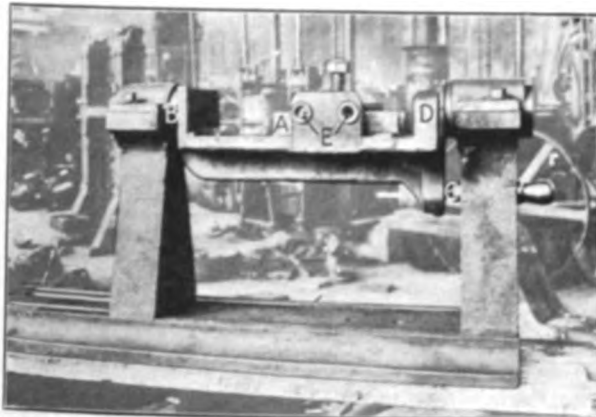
DRILL JIG FOR BALANCE WEIGHTS
